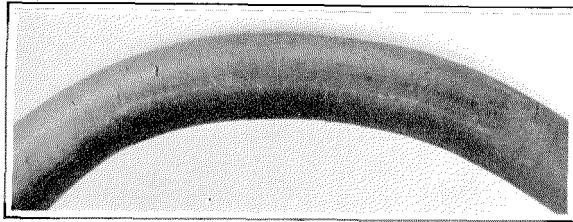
Unalloyed Lead Sheath Scratched with Emery—Fatigue Specimen Bent After Test.
